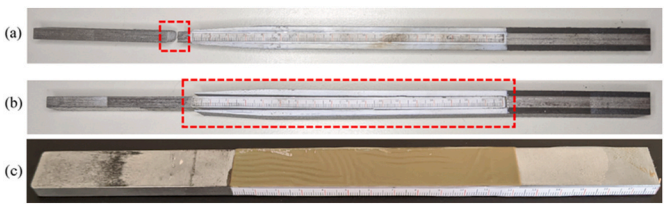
Two failure modes: a) aluminium central adherend failure, b) bond failure, and c) fracture surface of bond failure specimen.
